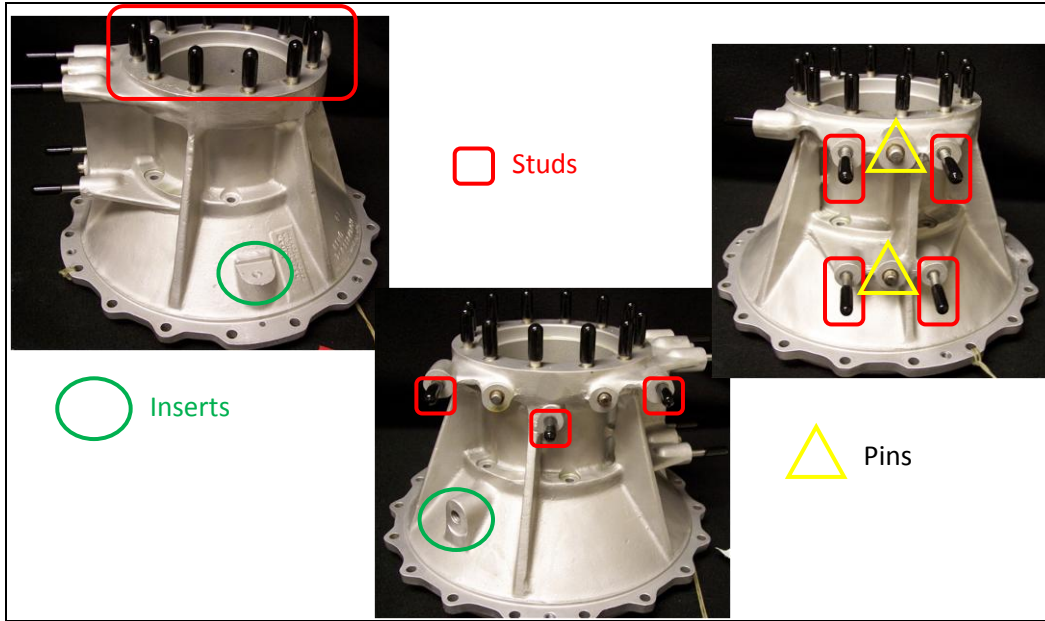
Tail rotor cover contains 12 studs on machine face (left), 7 extended studs (center and right), 2 alignment pins (right), and 2 inserts (left and center).
